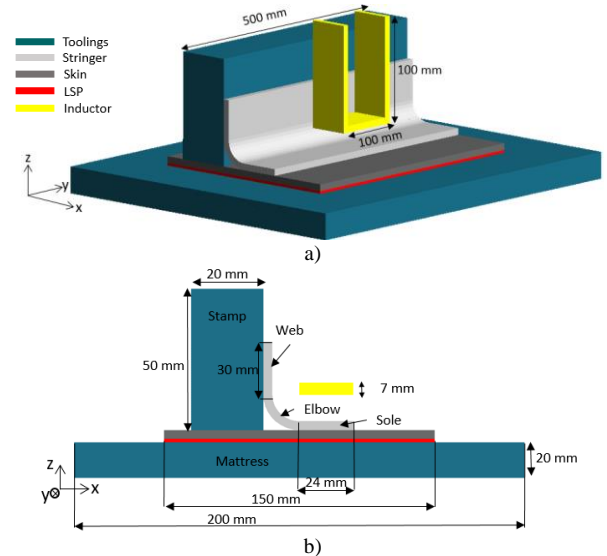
Welding configuration: a) 3D configuration and b) 2D configuration
